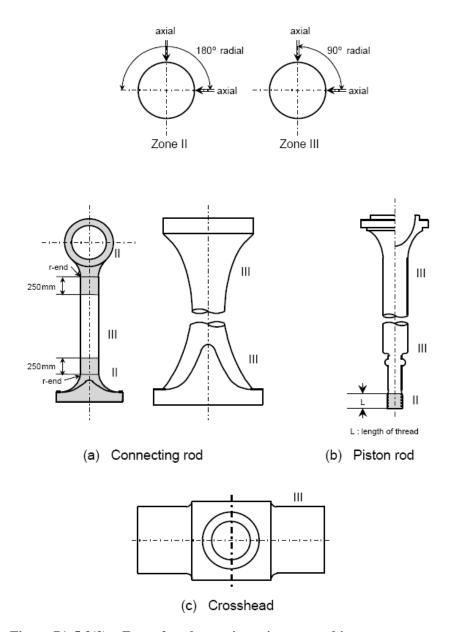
A.5.3(3) Zones for ultrasonic testing on machinery components
